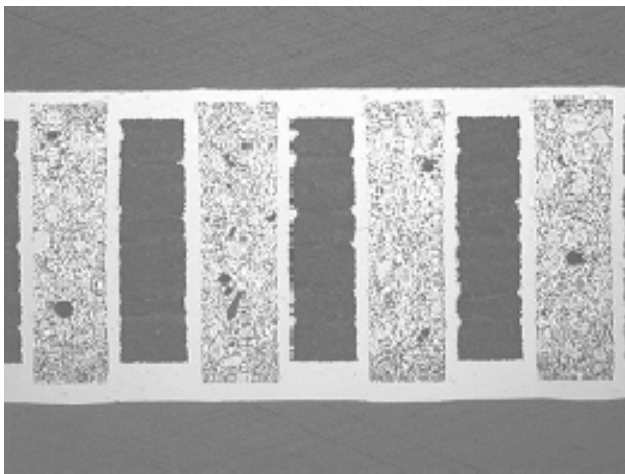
Surface Mount Solder Pad on Top of the Via Structure
